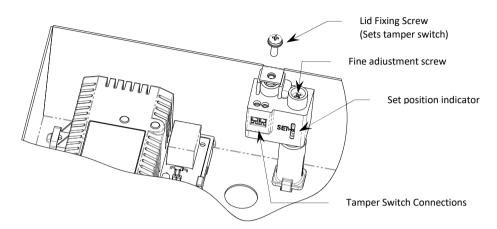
Position of tamper assembly on 'hinged lid' style enclosures
